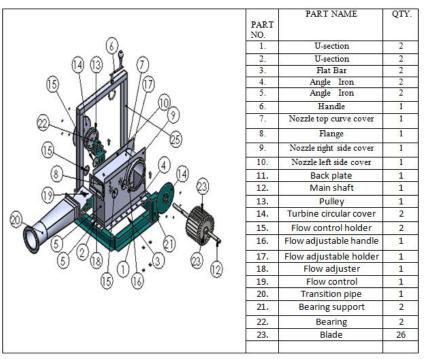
Exploded View of the Crossflow Micro-Hydro Turbine
